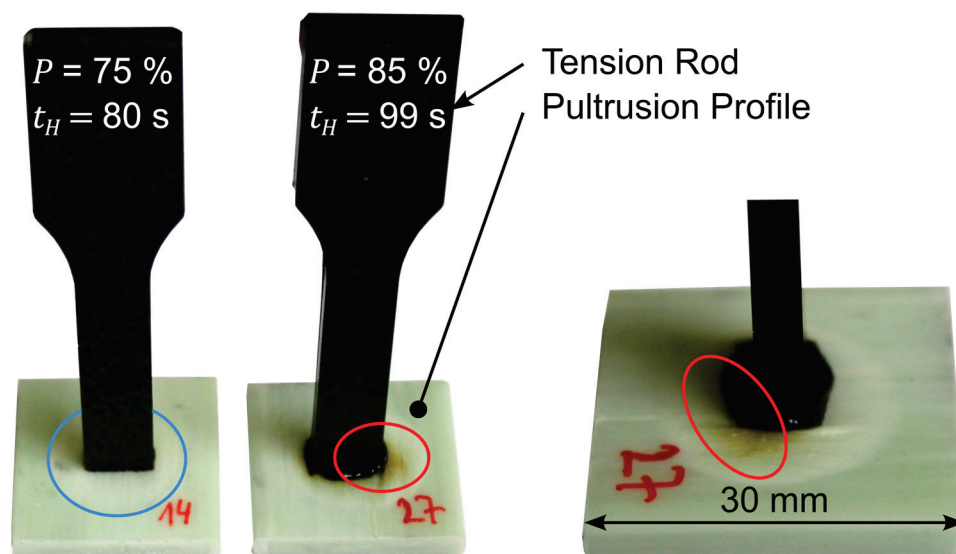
Photographs of welded samples. A detailed view of the right-hand sample is shown on the right.
